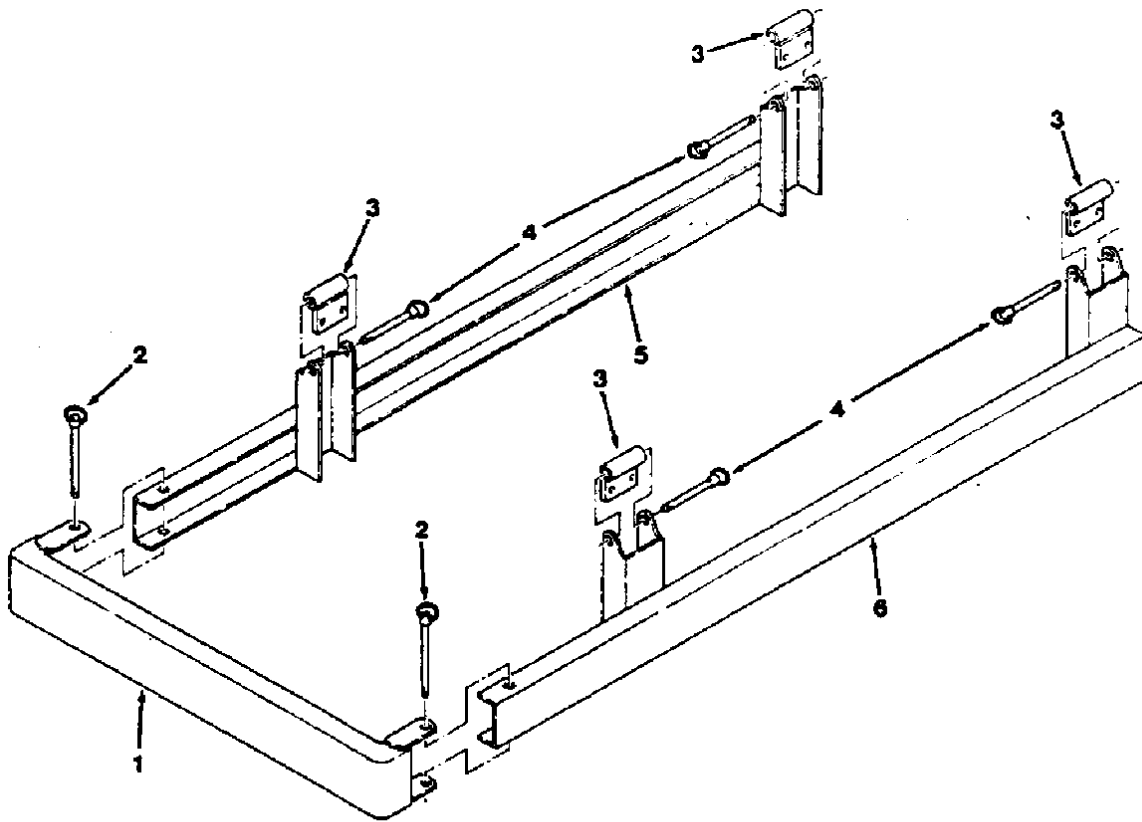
WRAPAROUND BUMPER ASSEMBLY
